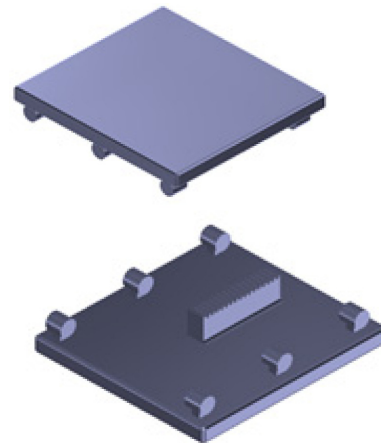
Traction device upper plate: Move along the rail of the bottom plate and reciprocating motion.
